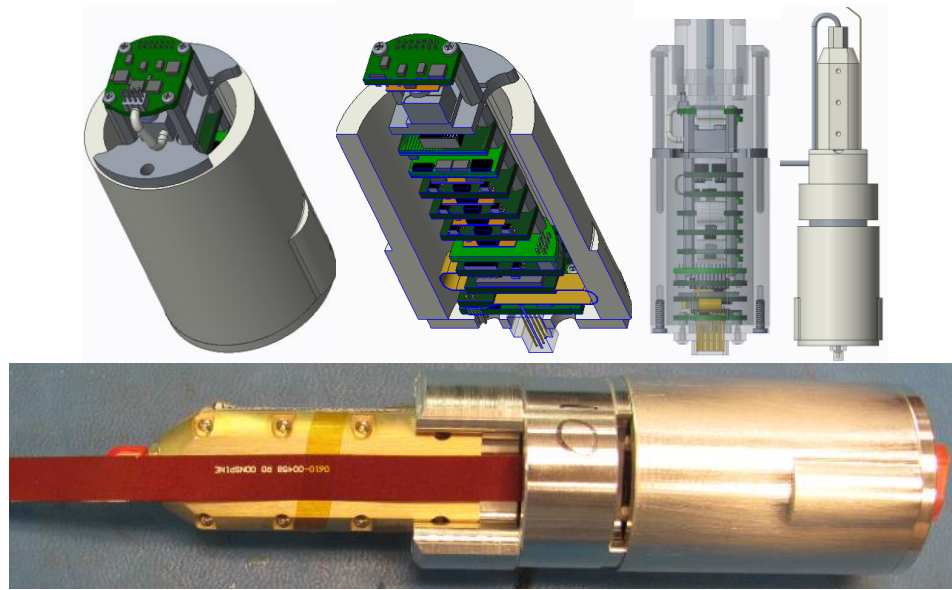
Creo models of the ARRT-174 Instrumented PGK AMM System mounted inside of an ODN Module (Top). Assembled ODN Module with AMM System secured inside (Bottom)
